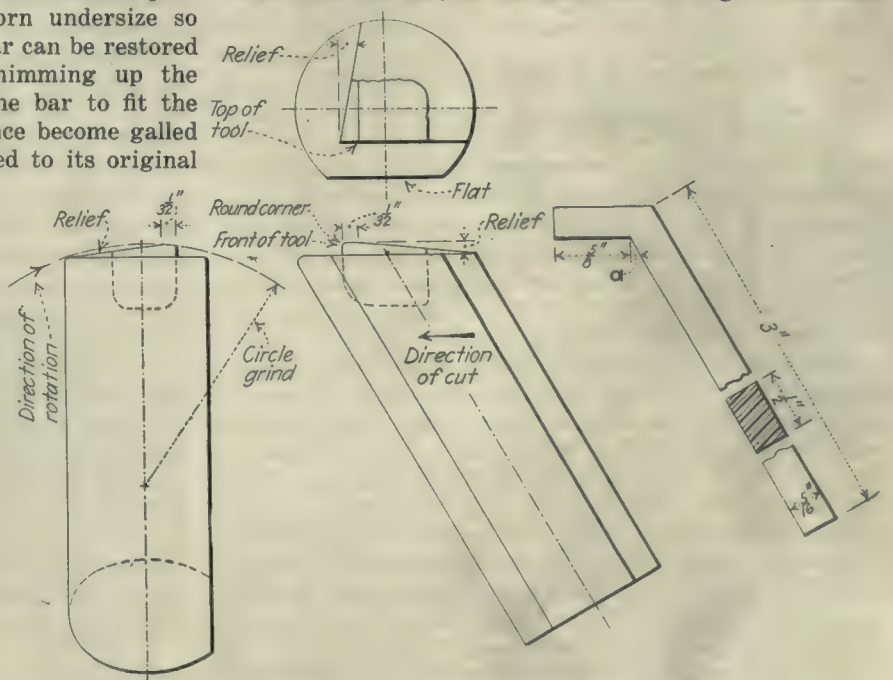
DETAILS OF SHANK WITH DIAMOND FASTENED TO IT AND GAGE FOR CHECKING RELIEF AND ANGLE
